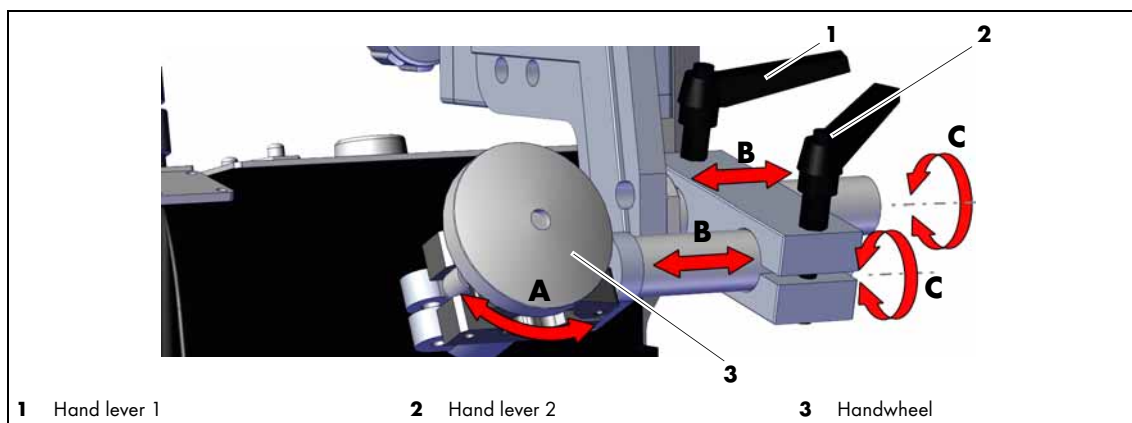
Possible adjustments to set the position and angle of the welding torch
